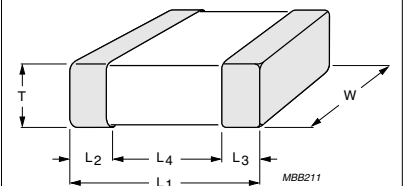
Surface mounted multilayer ceramic capacitor dimension
